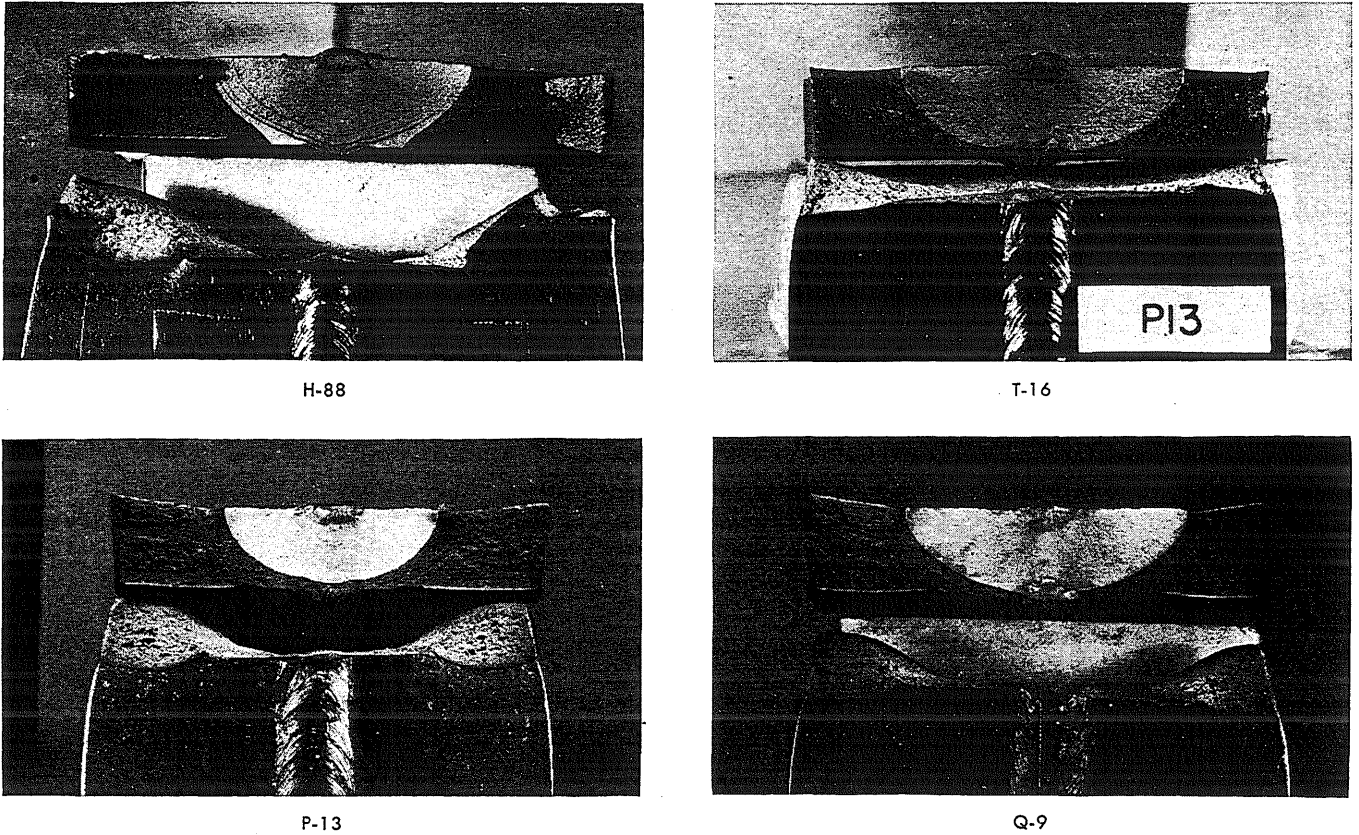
Typical fractures of longitudinal butt welds
